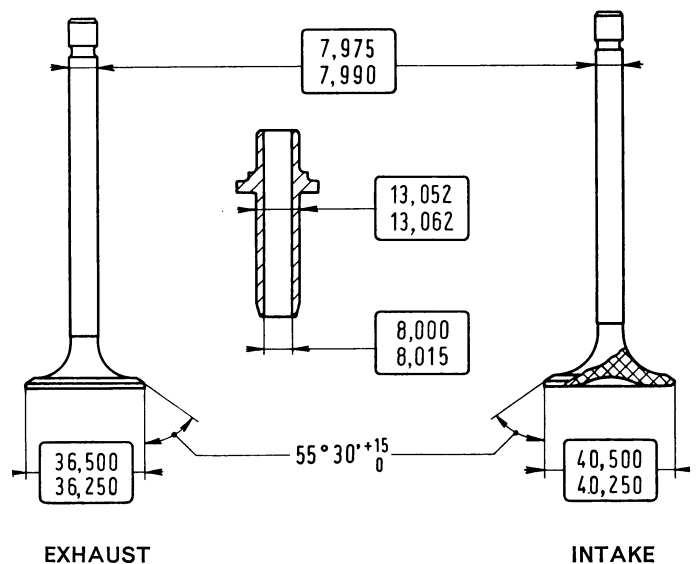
Critical dimensions (in mm) and angles of 118 B.000 engine exhaust and intake valves and valve guides.
